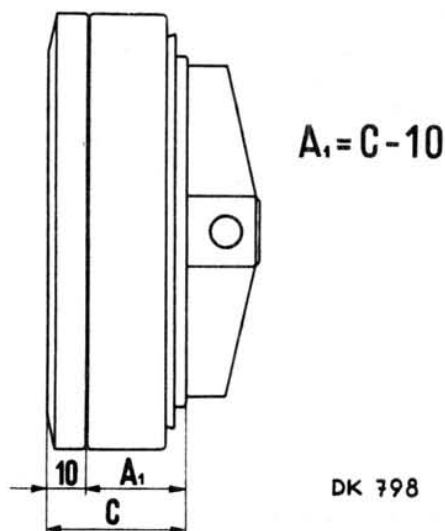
/3 - Clamping of Bearing in MP 5-105 Jig
